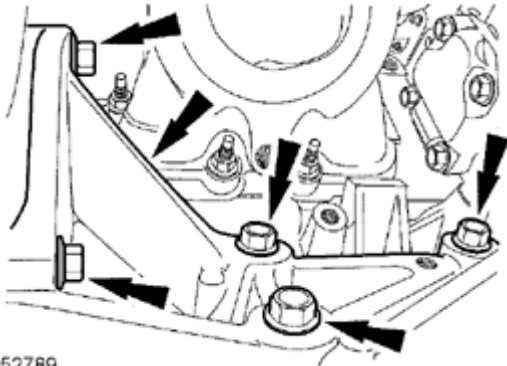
Locating Bolts And Power Transfer Unit (PTU)
